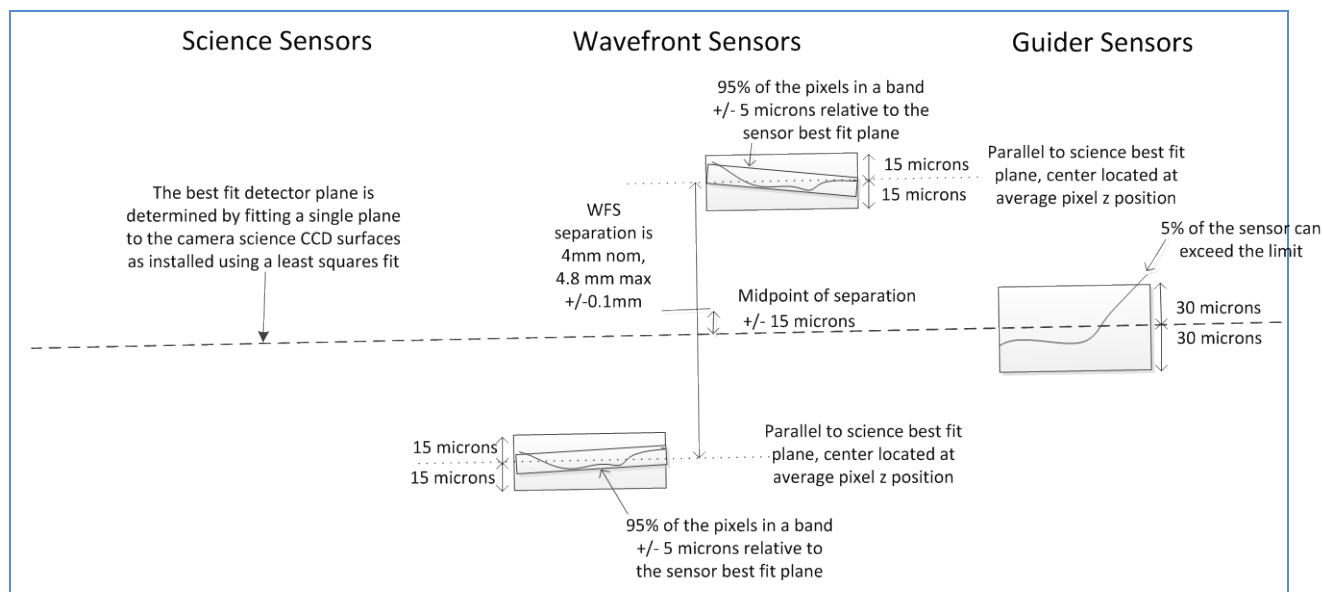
Corner raft sensor mechanical alignment and tolerance requirements
